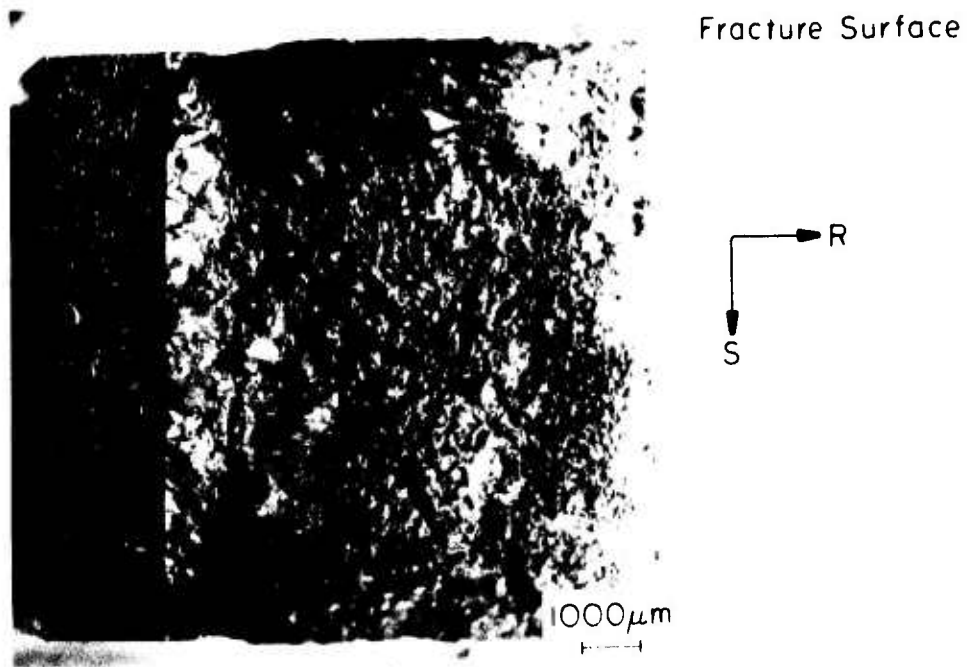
Alloy 334, sample 4LRE2. Fracture surface X8, surface replica X5200.
